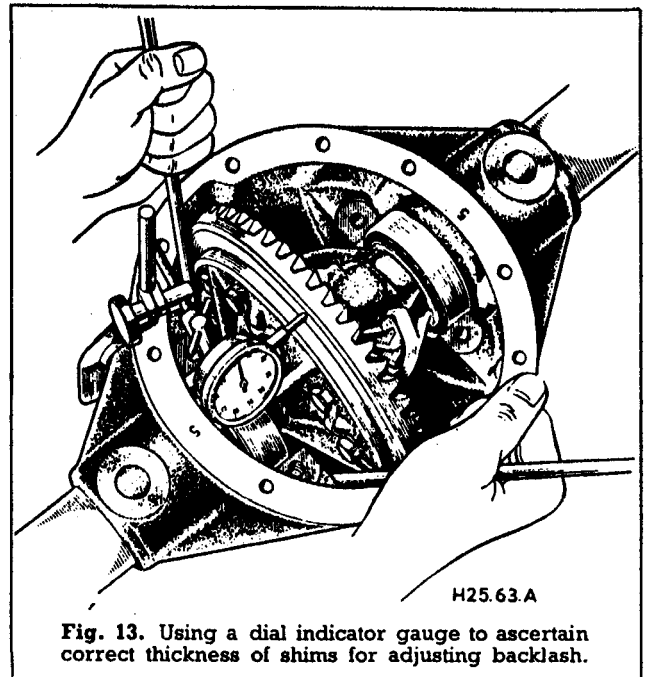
Using a dial indicator gauge to ascertain correct thickness of shims for adjusting backlash.
